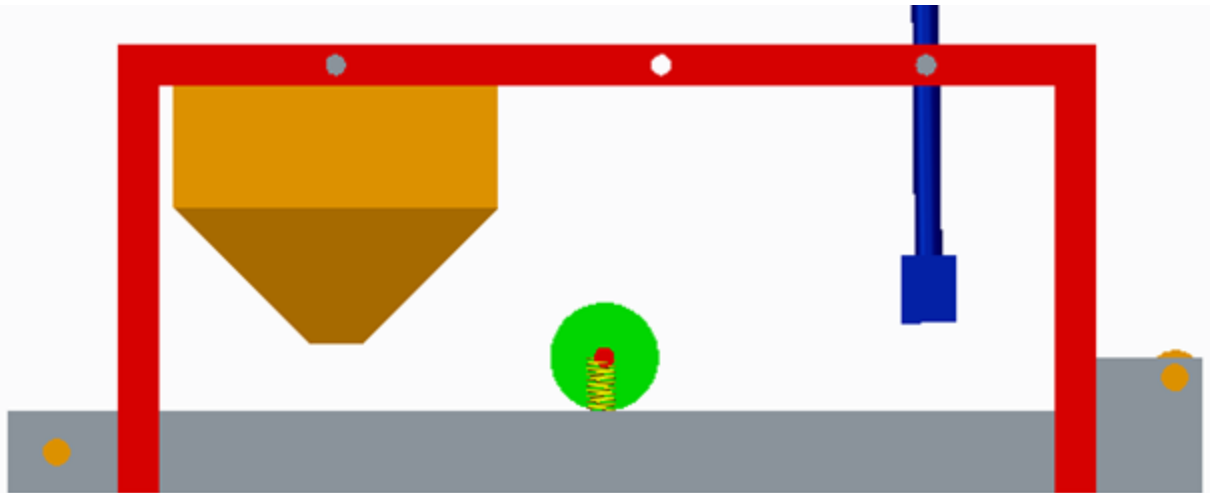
A CAD drawing of the full assembly of design concept #1. This is the side view.
